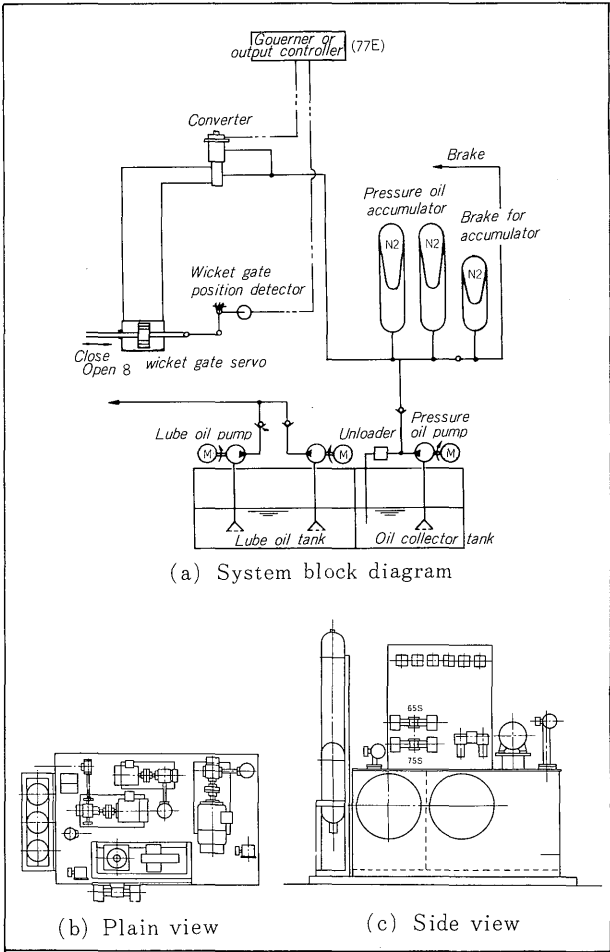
TU type hydraulic turbine governor and bladder type pressure oil system
